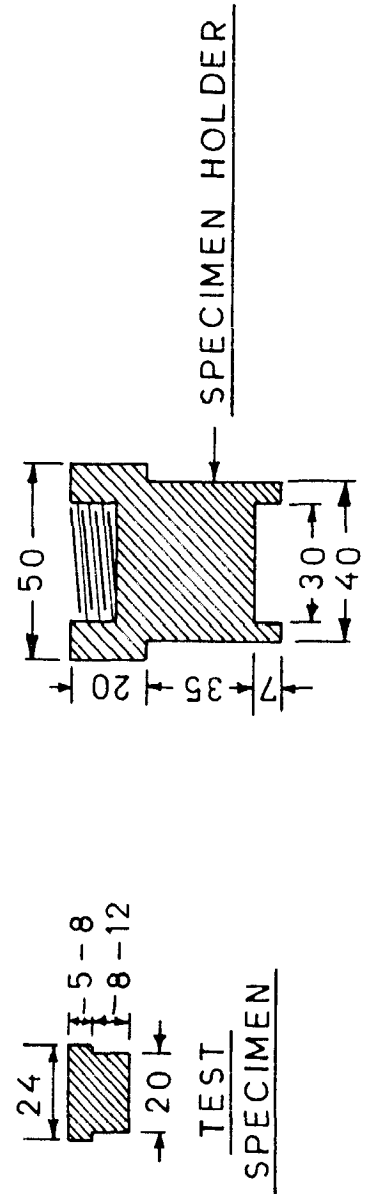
DISC - PIN RIG FOR GOUGING WEAR TEST
